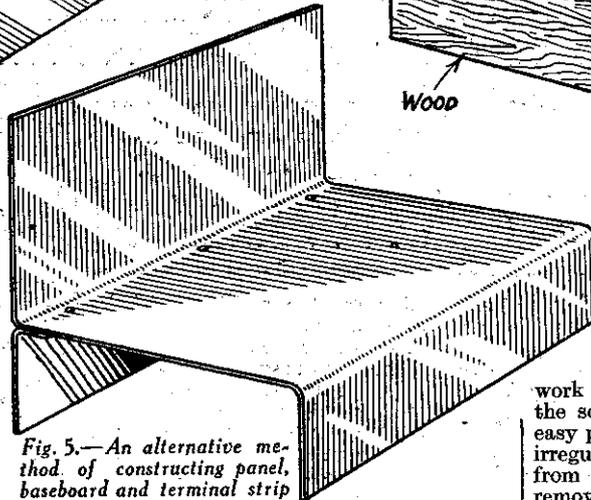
An alternative method of constructing panel, baseboard and terminal strip in one piece.
